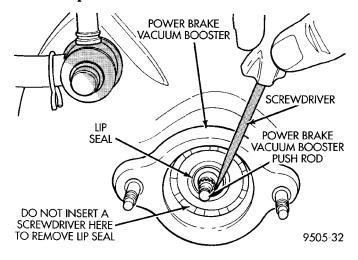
Removing Seal From Vacuum Booster BLEEDING MASTER CYLINDER
